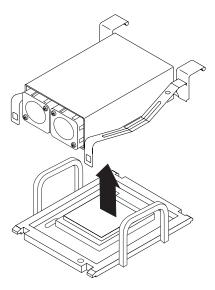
Lifting the Heat Sink from the CPU Socket
